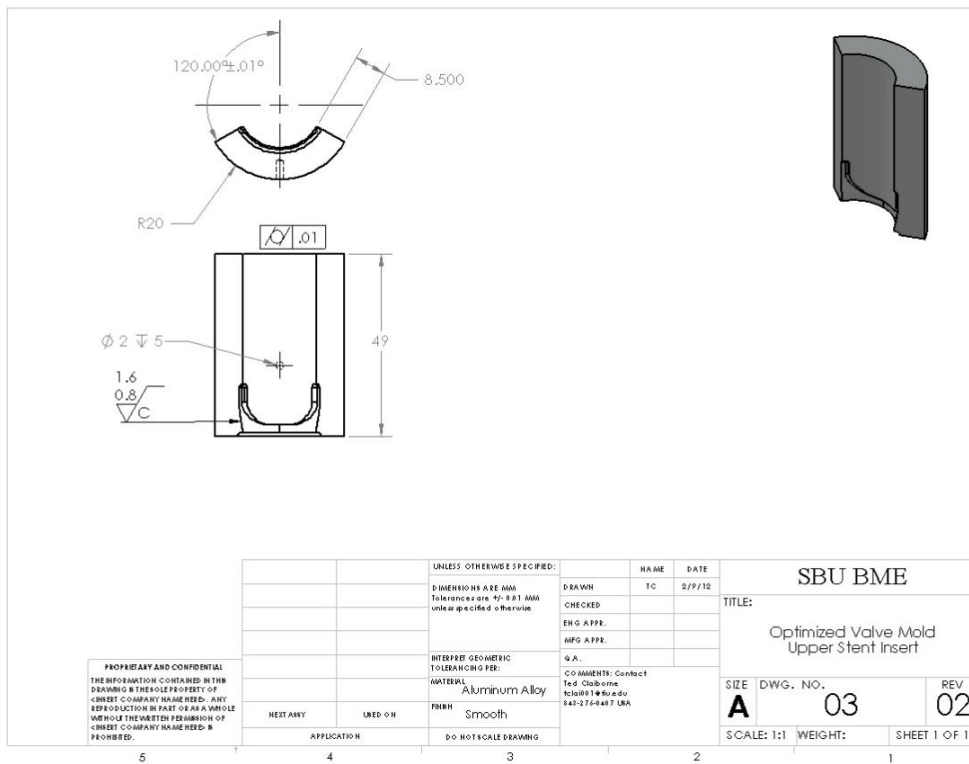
Engineering drawing of the optimized valve outer stent mold.
